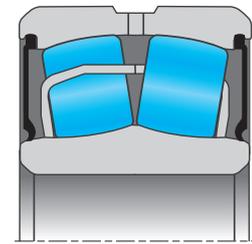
Cross-sectional diagram of the Ultage design with a drawn steel cage (EA)
